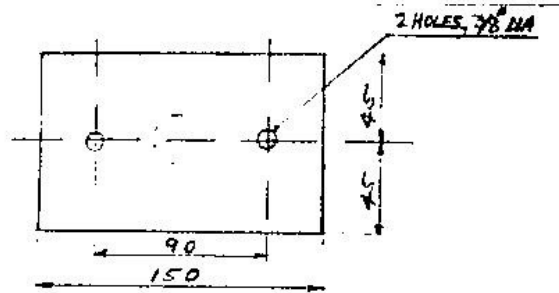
BEARING PLATES, 2 off, 3/4\" THICK MILD STEEL
